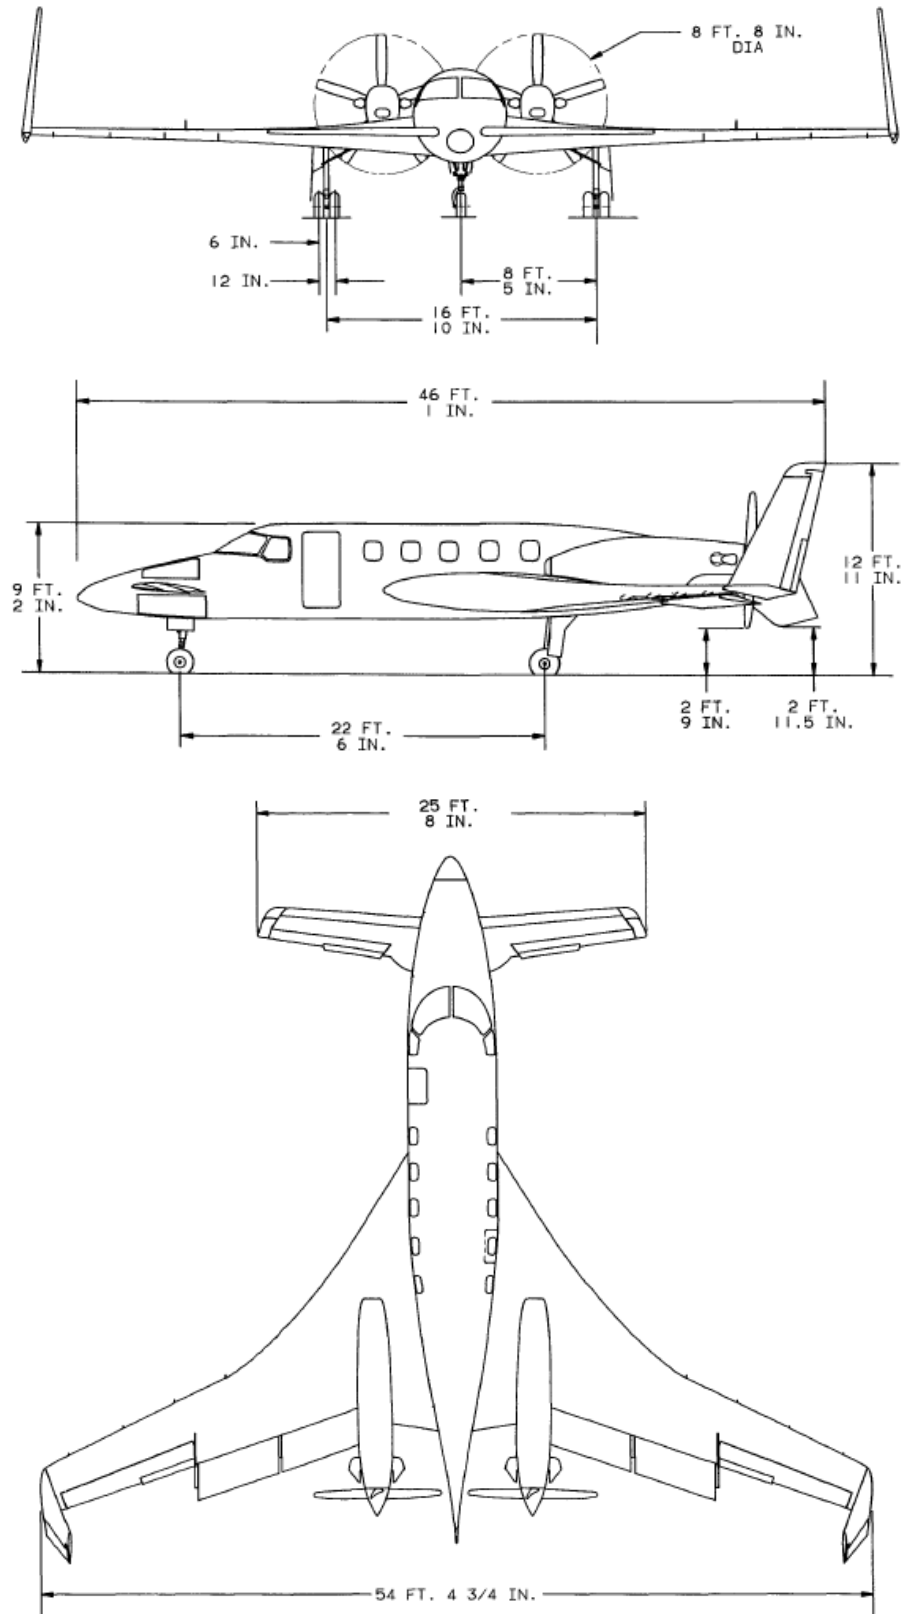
Beechcraft Starship airplane 3-view drawing with dimensions [2]
